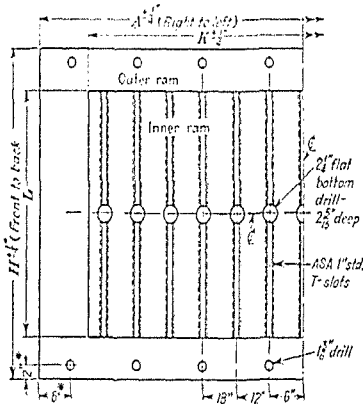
Location, spacing, and size of holes for mounting handling hooks to the bolster plate in straight-side presses.
